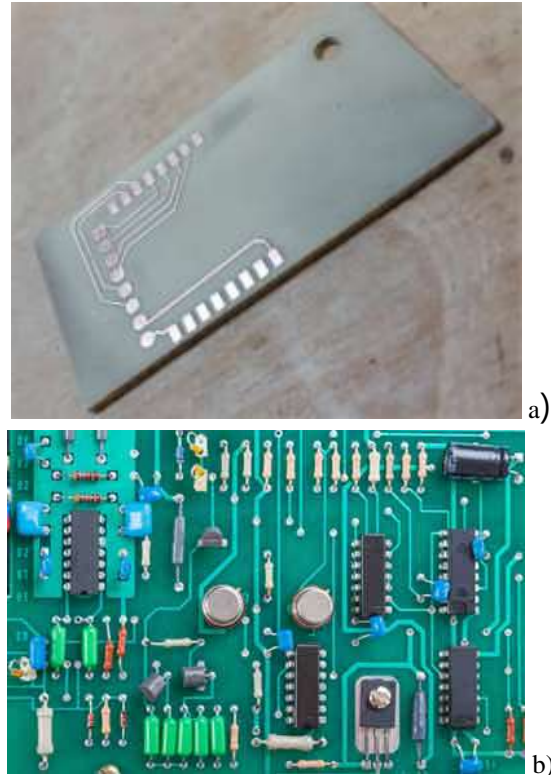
, Two examples in designing of printing circuit board (PCB): a) monolayer and b) multilayer design
